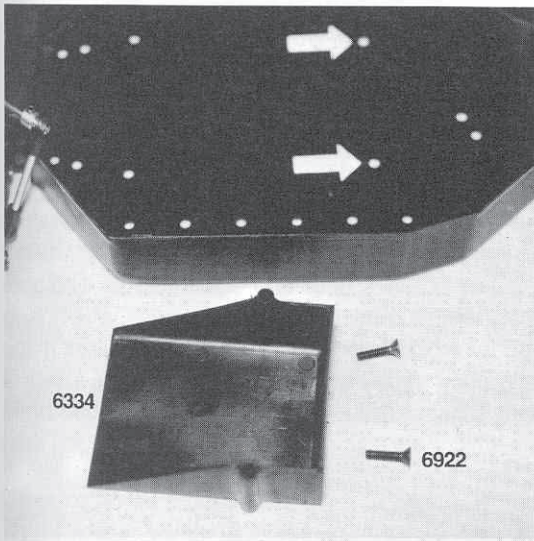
, 111 & 112 1) Open bag #8-7 and remove the #6334 battery cup and two #6922 4-40 x 1/2" flat head socket screws. Near the center of the chassis there are two holes for mounting the battery cup (fig. 110). 2) Place the cup in the chassis as shown and 3) secure it from the bottom with the two #6922 screws. These holes are countersunk to accept the screw heads.
